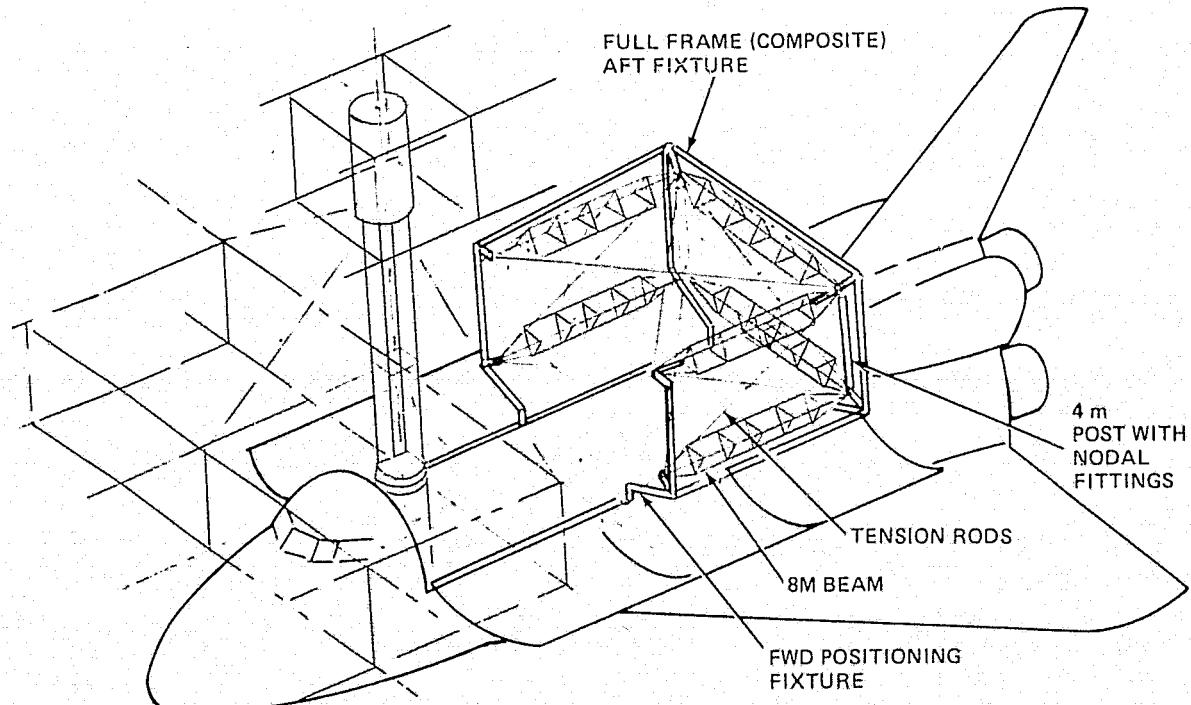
OCDA Platform Assembly Fixture (On Orbiter)
